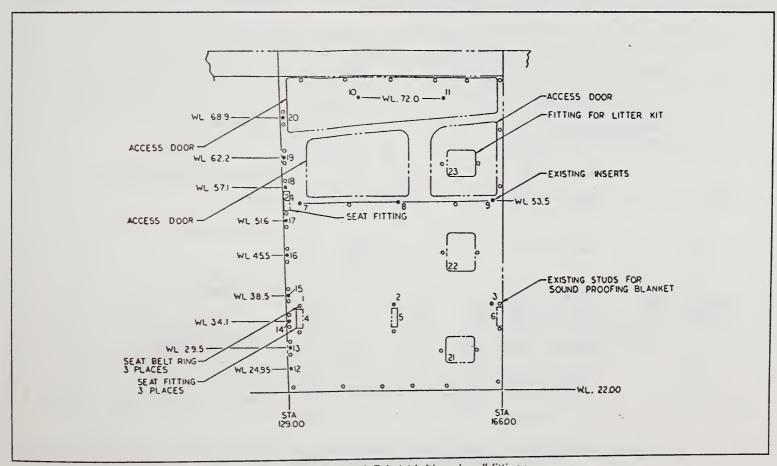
Bell 205A B.L.14 lefthand wall fittings.
